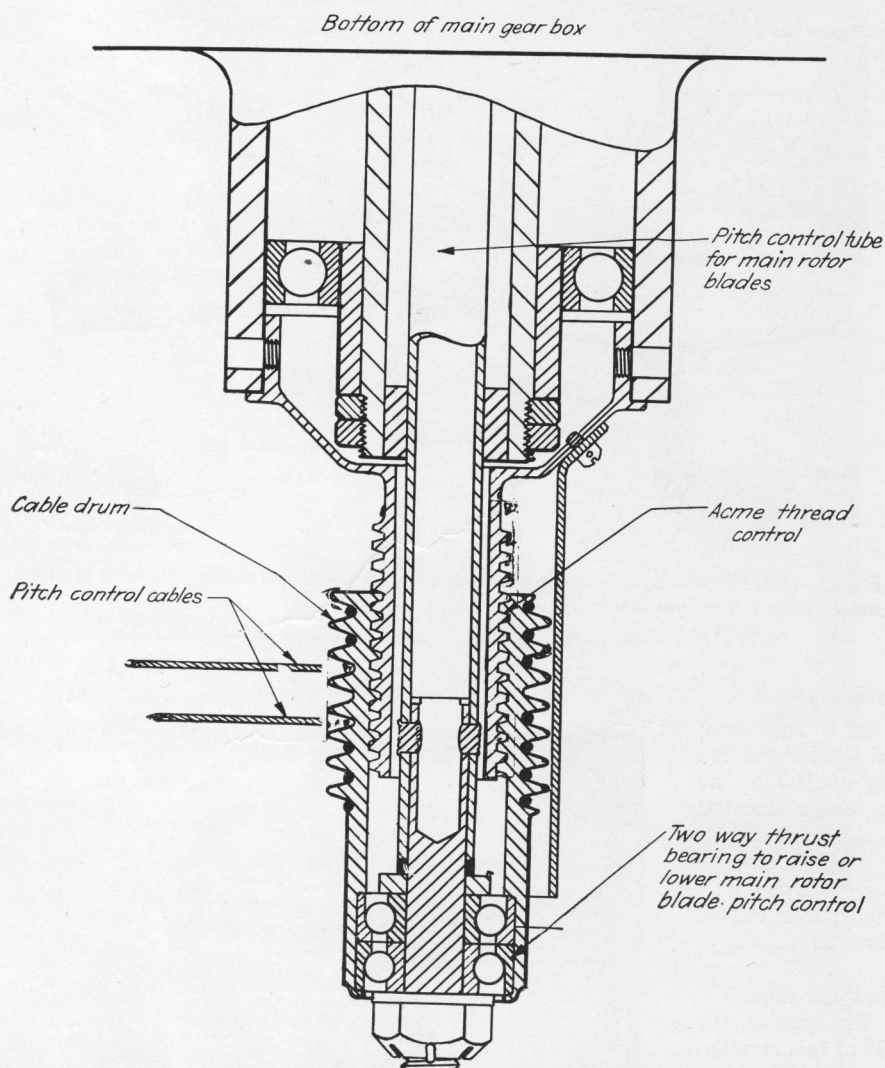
Sectional drawing showing how the pitch-control drum is mounted on the bottom of the main gearbox and raises and lowers the vertical tube through the center of the main rotor drive tube.
